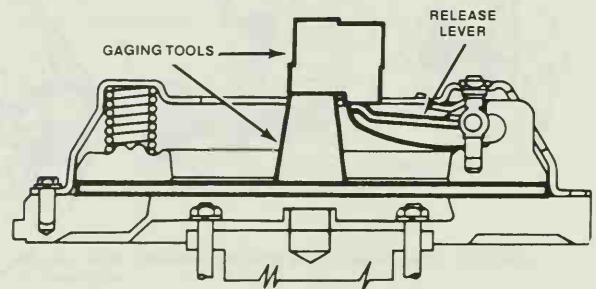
Gaging tools may be used to measure release lever height. (American Motors Corporation)
